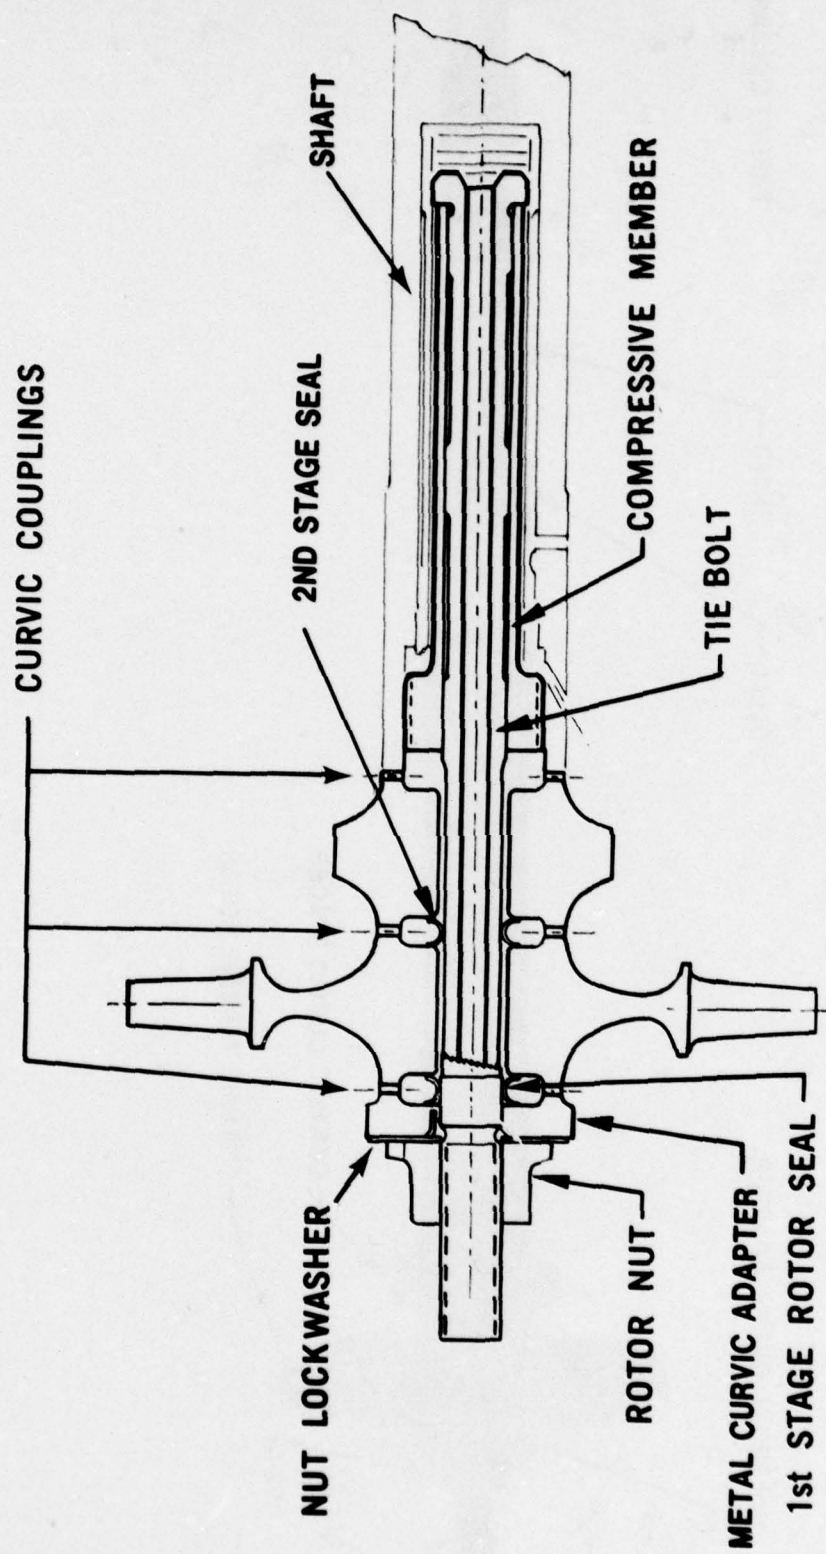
Cross Section Drawing of Ceramic Spacer Attachment System.
